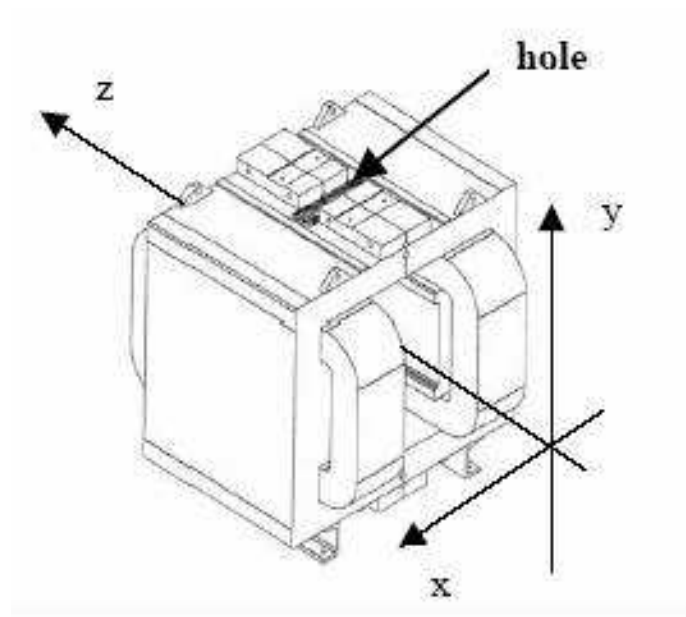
Schematic drawing of the IPM dipole magnet.
